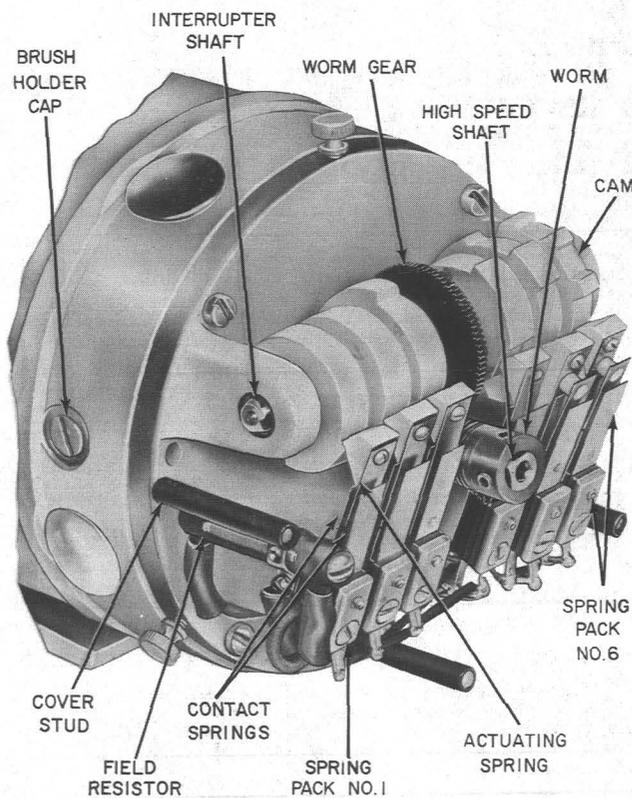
KS-15804 L1 Ringing Machine—Holtzer-Cabot Corp—Interrupter End Shown With Cover Removed
